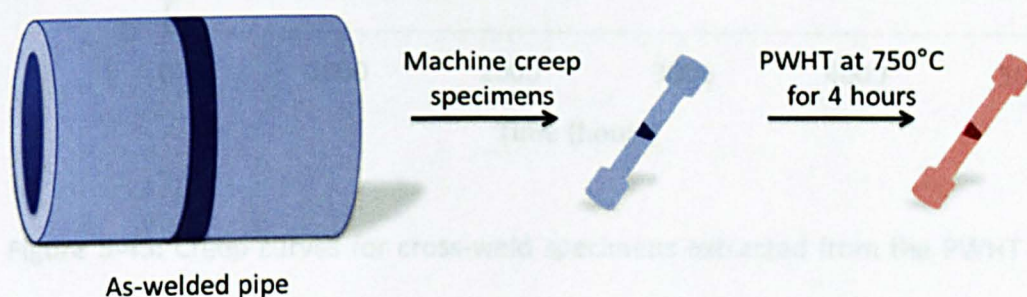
Schematic illustration of the processing history of cross-weld specimens PWHT after being machined from the as-welded pipe.
